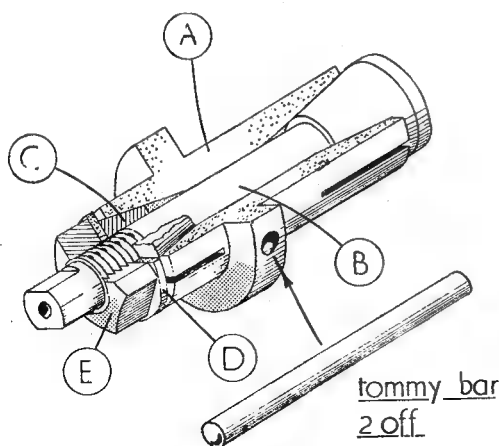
Details of the adapter : "A"—the body ; "B"—coned draw-bolt ; "C"—sliding cone ; "D"—washer ; "E"—draw-nut
